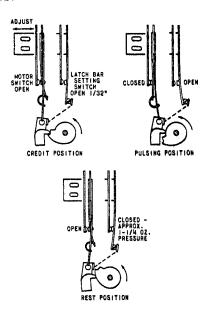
MOTOR & LATCH BAR SETTING SWITCHES.
